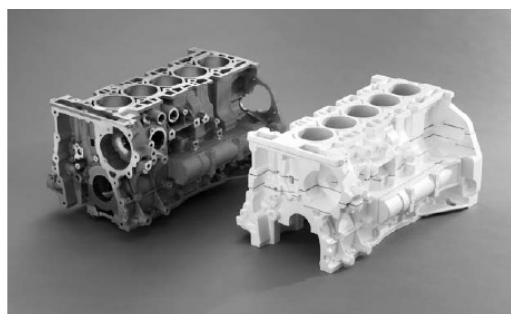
The Styrofoam pattern and the finished casting of a five-cylinder engine block produced by lost foam casting. (Courtesy General Motors Corporation, Detroit, MI)
